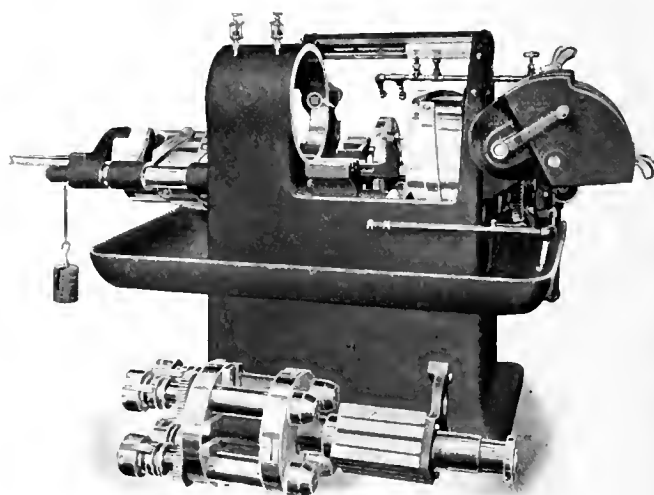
The Machine Partially Disassembled, showing the General Scheme of the Design.
